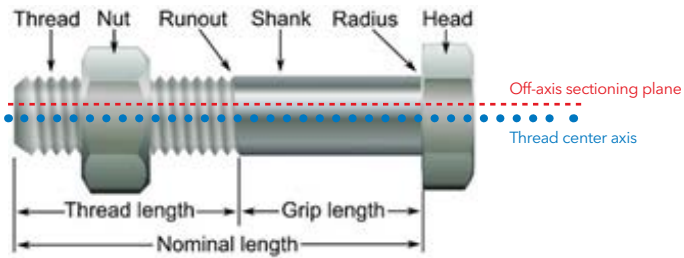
Schematic illustration of threaded component with thread axis, and off-centre sectioning plane.
